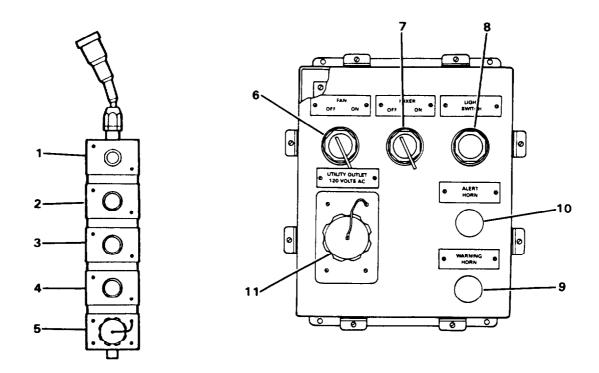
Switch Panels No. 1 (Left) and No. 2 (Right)
